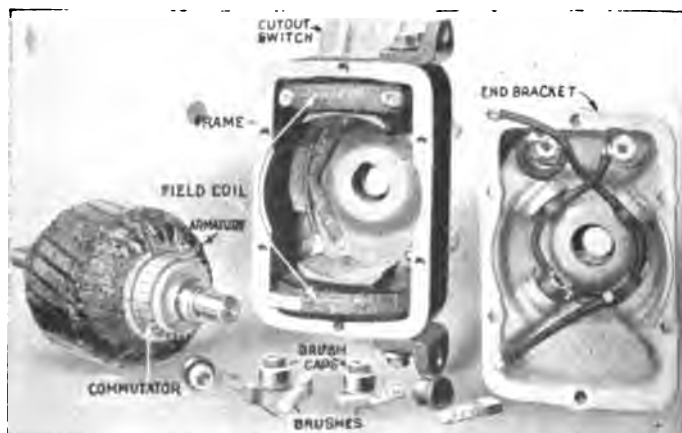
Westinghouse generator with reversed series field regulator and internally mounted cutout
